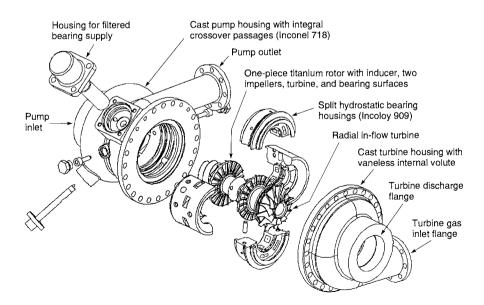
Cut-away view of an experimental turbopump demonstrator with a single-stage liquid oxygen pump impeller, an inducer impeller, and a single-stage turbine (one row of blades) on the same shaft. (Courtesy of The Boeing Company, Rocketdyne Propulsion and Power.)
